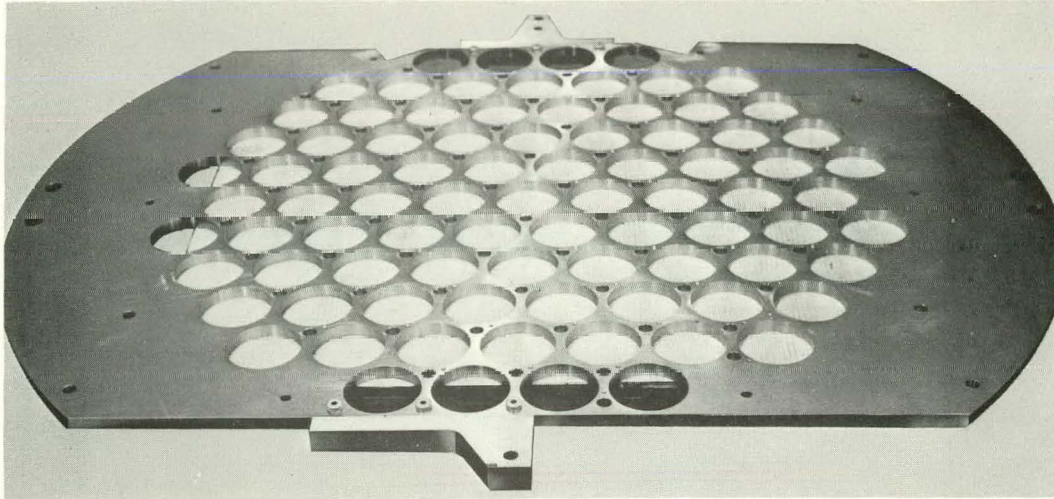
Completed top tube sheet (Neg. P62-7-17B)
